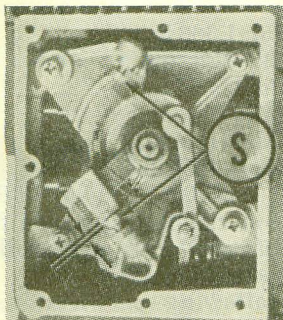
Gear change stop bolts (S) should have approximately 1MM clearance when stop ball engages detent in shifter cam.
